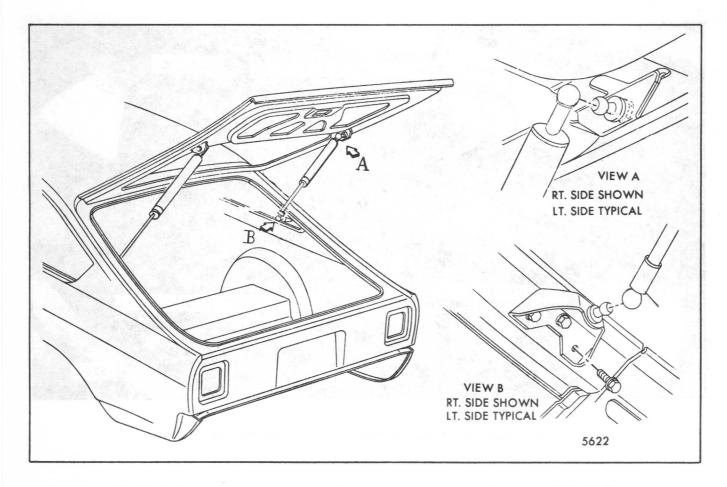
Hatchback Lid Support Assembly Attachment - "H-77" Shown, "H-07" and "X-17" Similar
